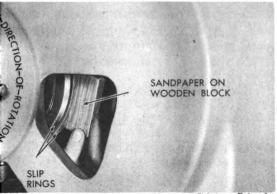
Smoothing Slip Rings With Sandpaper on Block of Wood.
